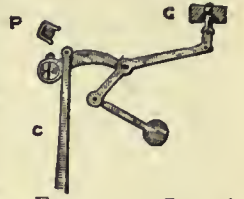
Central Guide and Type-bar of Yost Machine.
